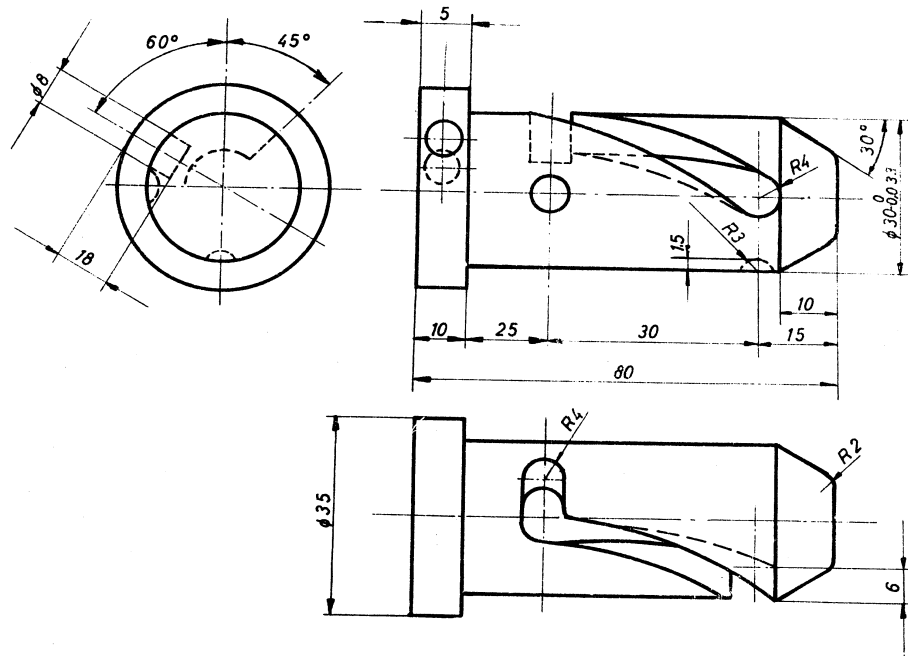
SPRING DEVICE DISCONNECTING BOLT -- LEFT
